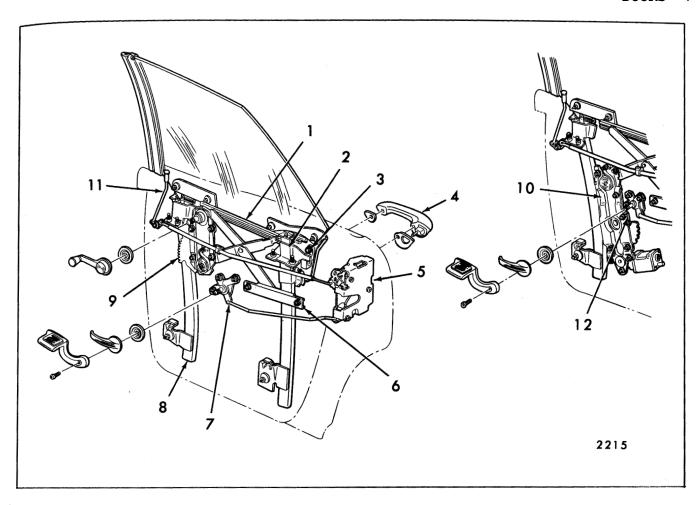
Rear Door Hardware - "A-39" Styles
